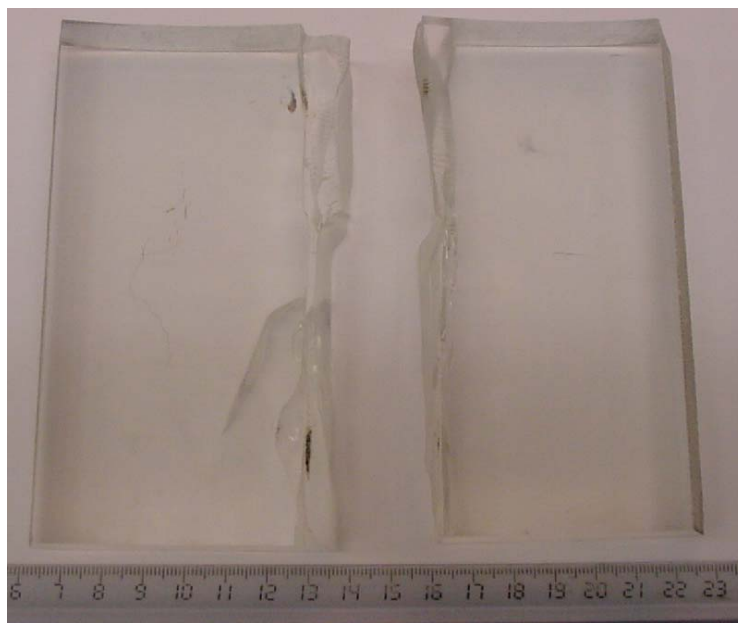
Shattered acrylic insulator after a single 900-J pulse.
